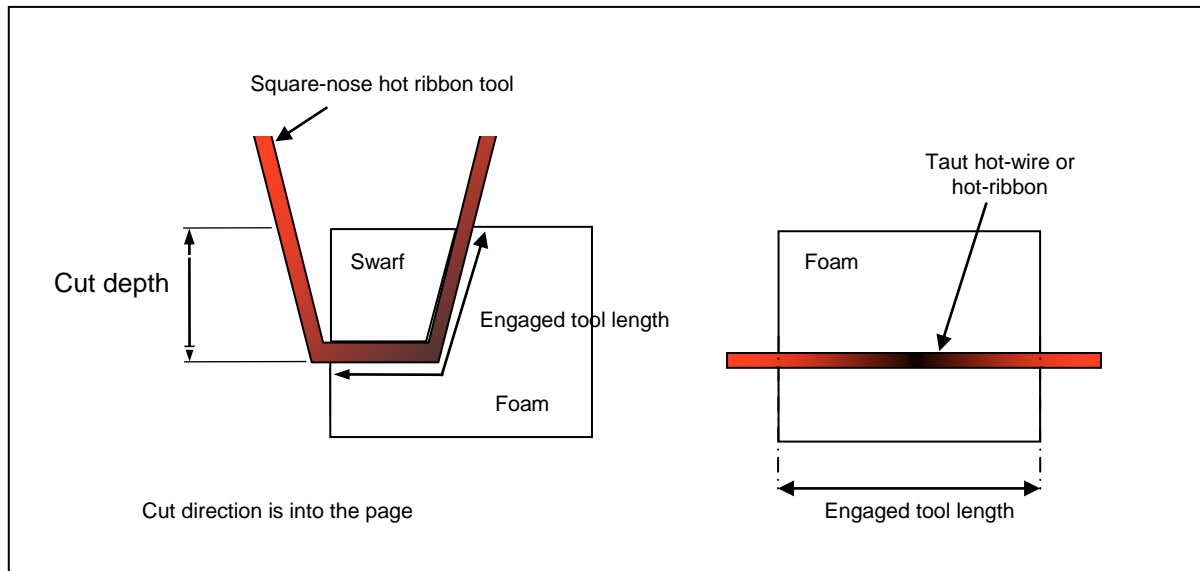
Engaged tool length for multi-pass (left) and single-pass cutting
